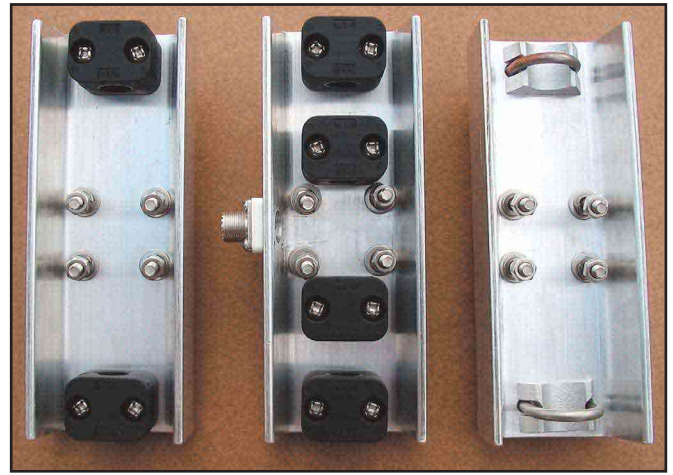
A bottom view of the mounting plates. Note the insulated element support blocks that are discussed in the text.
